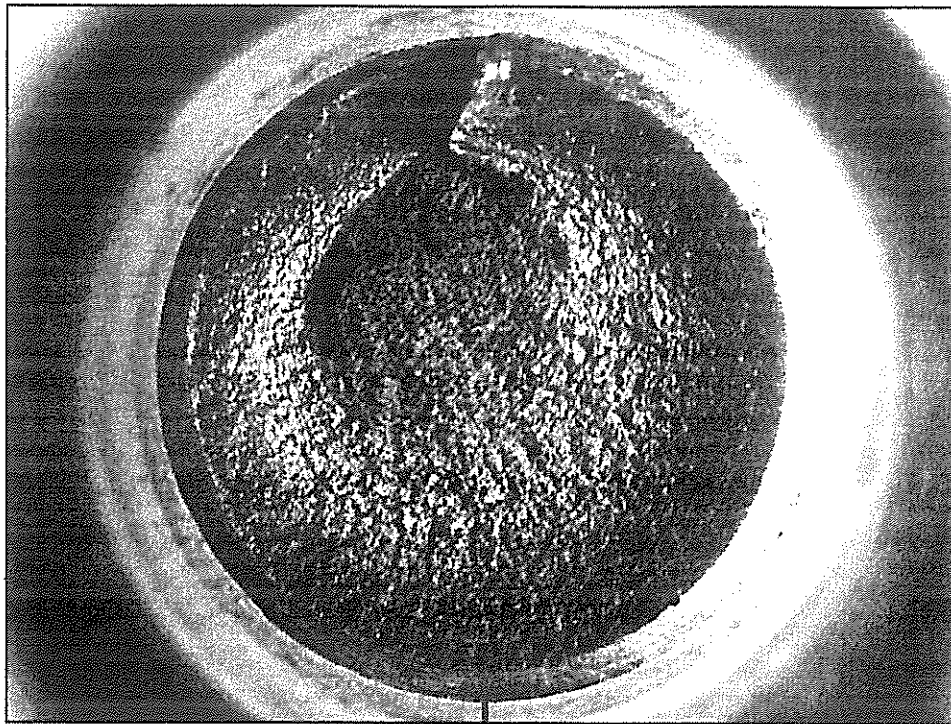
Loose bolt – although there appear to be some primary bending fatigue origins along the bottom edge, a majority of the fracture occurred in rotating bending fatigue
